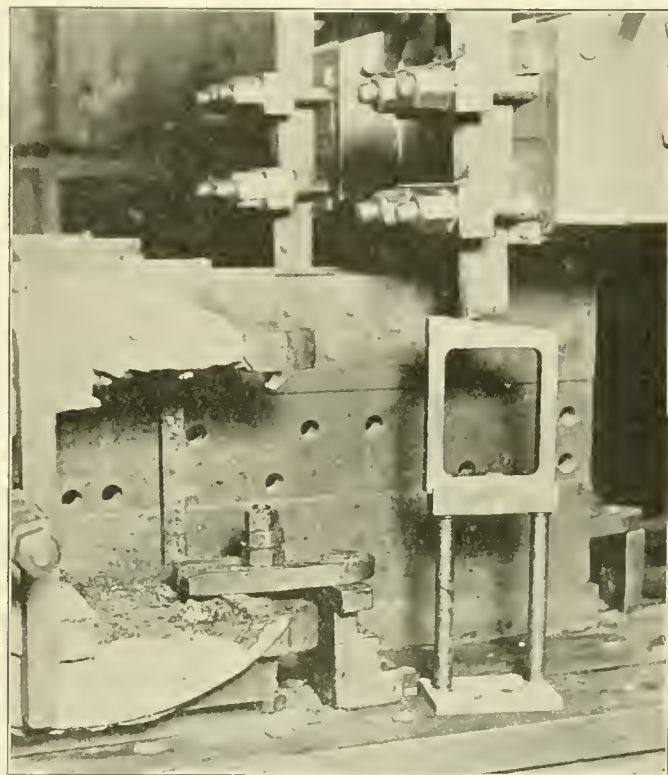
Gage Used in Setting Tool for Planing Boxes
